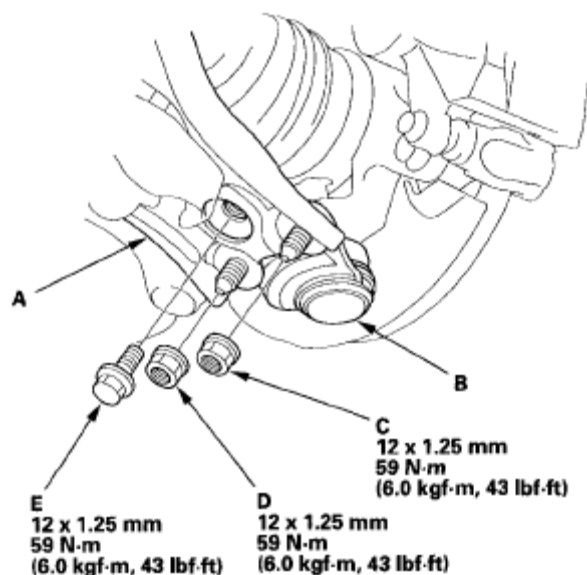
Identifying Lower Arm To Lower Ball Joint (With Torque Specifications)
